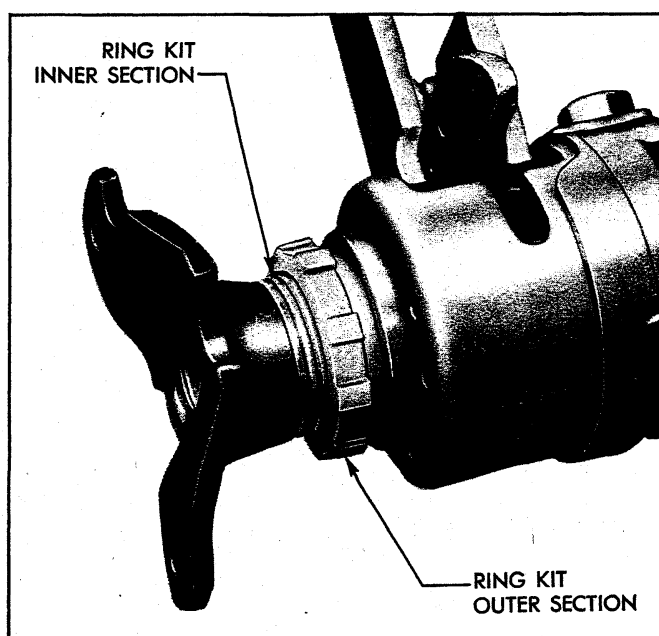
Tolerance Ring Kit—Final Adjustment
